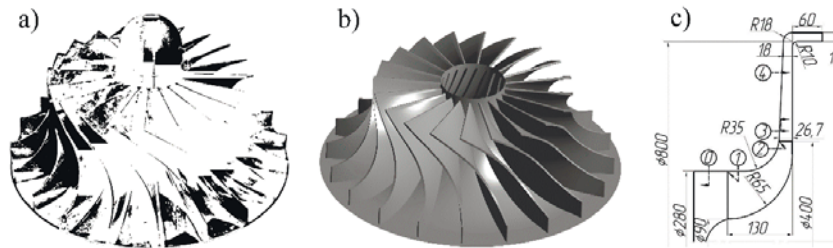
Impeller of centrifugal compressor a) - a photo of Eckardt impeller [5], b) - 3D model, c) Main dimensions and measuring points positions, measurements in mm
